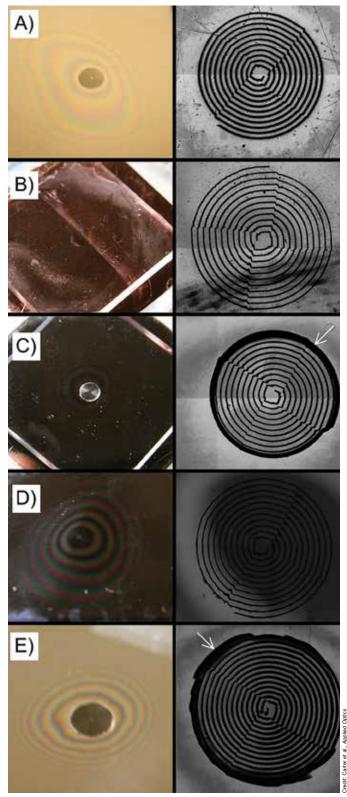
Our first of proof-of-principle welds in (A) Al-SiO $_2$ (B) Cu-SiO $_2$ (C) Stainless steel–BK7 optical glass (D) Si-SiO $_2$ (E) Stainless steel–Sapphire. These 2.5-mm diameter spirals are typical of a "spot weld arrangement." Note the backlash in our stage control—we have come quite a way since these samples! Taken from Carter et al.
